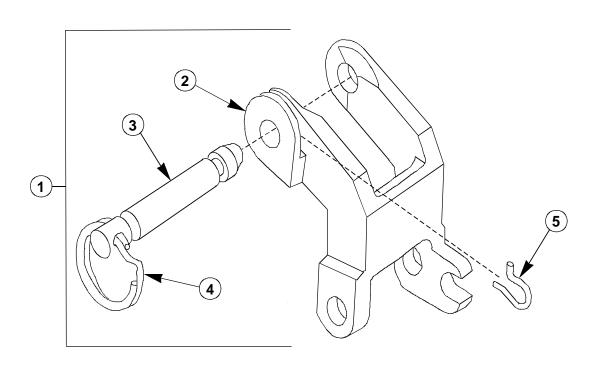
A. ADAPTER ASSEMBLY, TRIPOD
